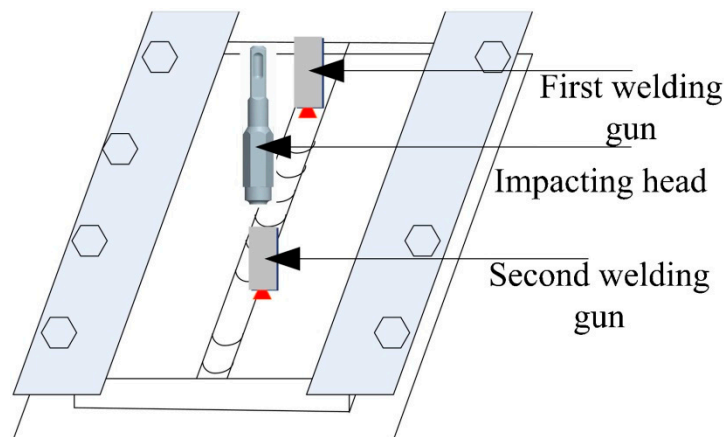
Scheme of the welding process using the two-pass impacting Trailing welding (ITW) method [23].
